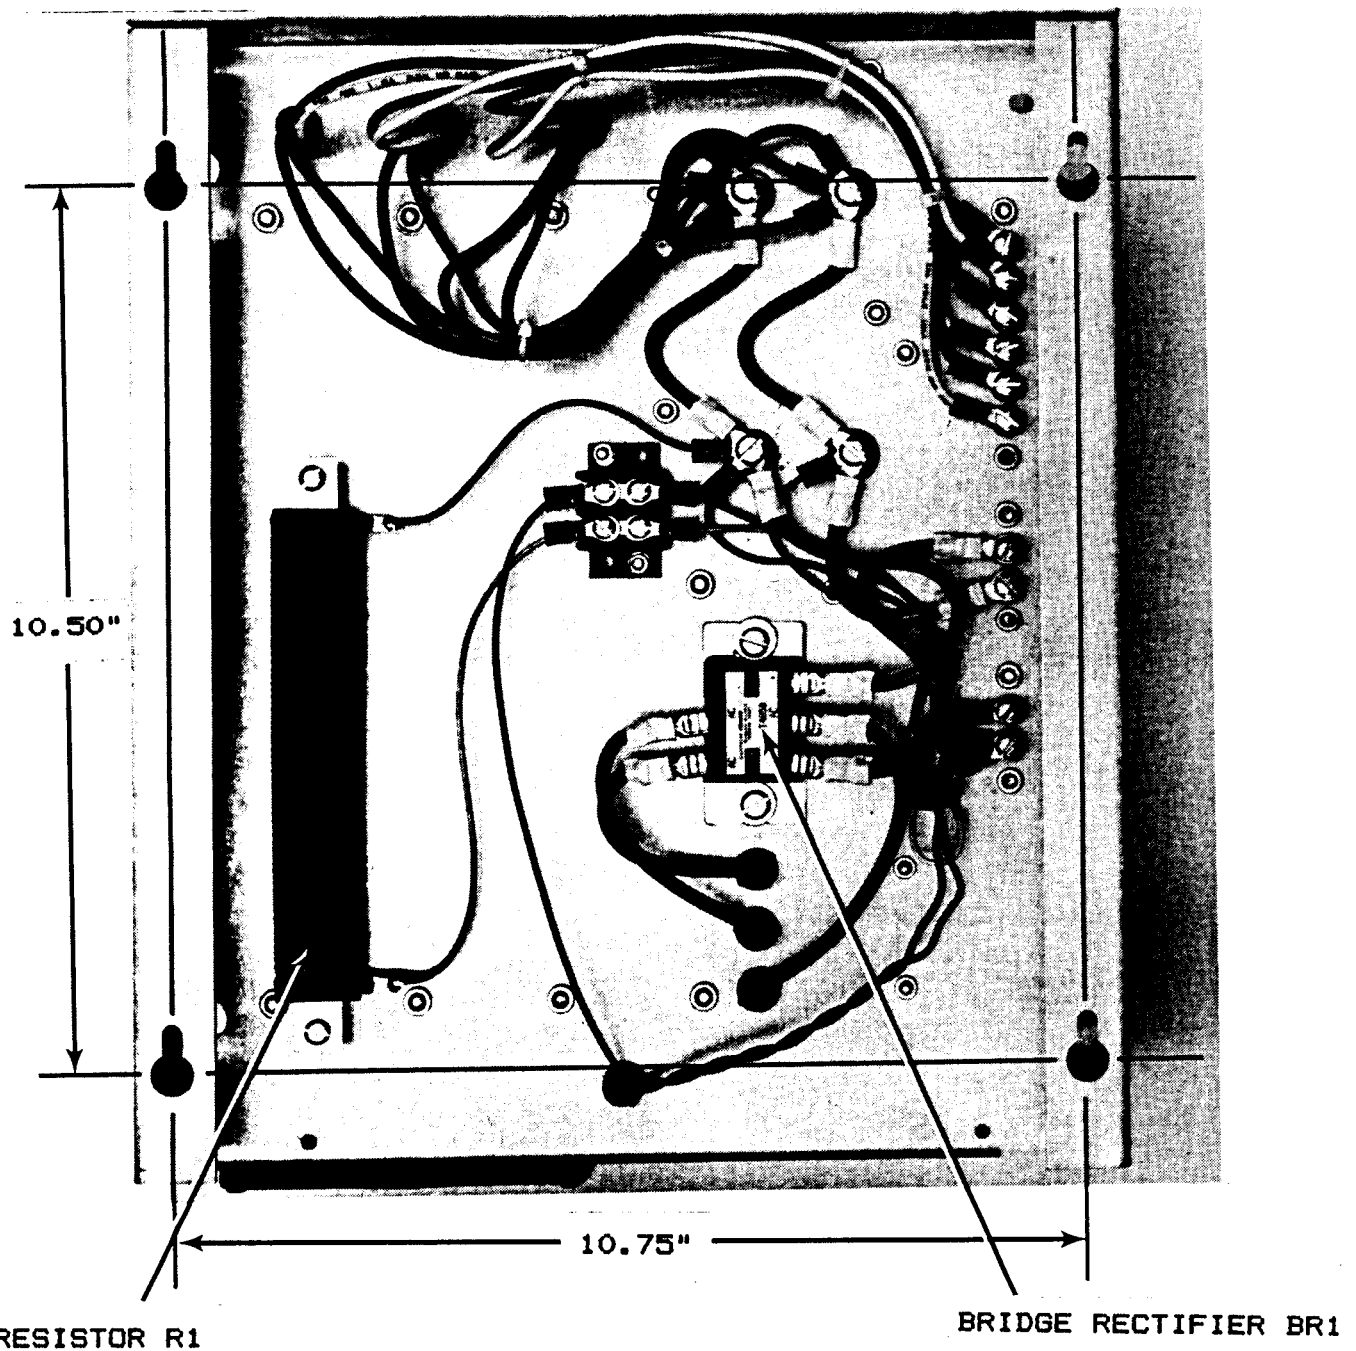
BACK VIEW OF THREE AXIS BASE PLATE SHOWING MOUNTING HOLE LOCATIONS
